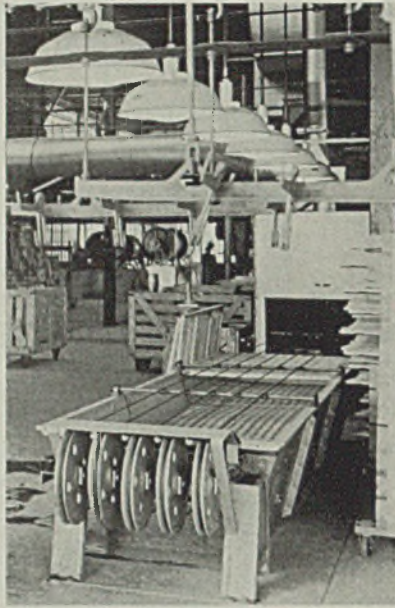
Unloading end of cable conveyor or serving cover coat drier. Note closely spaced high-intensity lighting fixtures to aid inspection at this point
